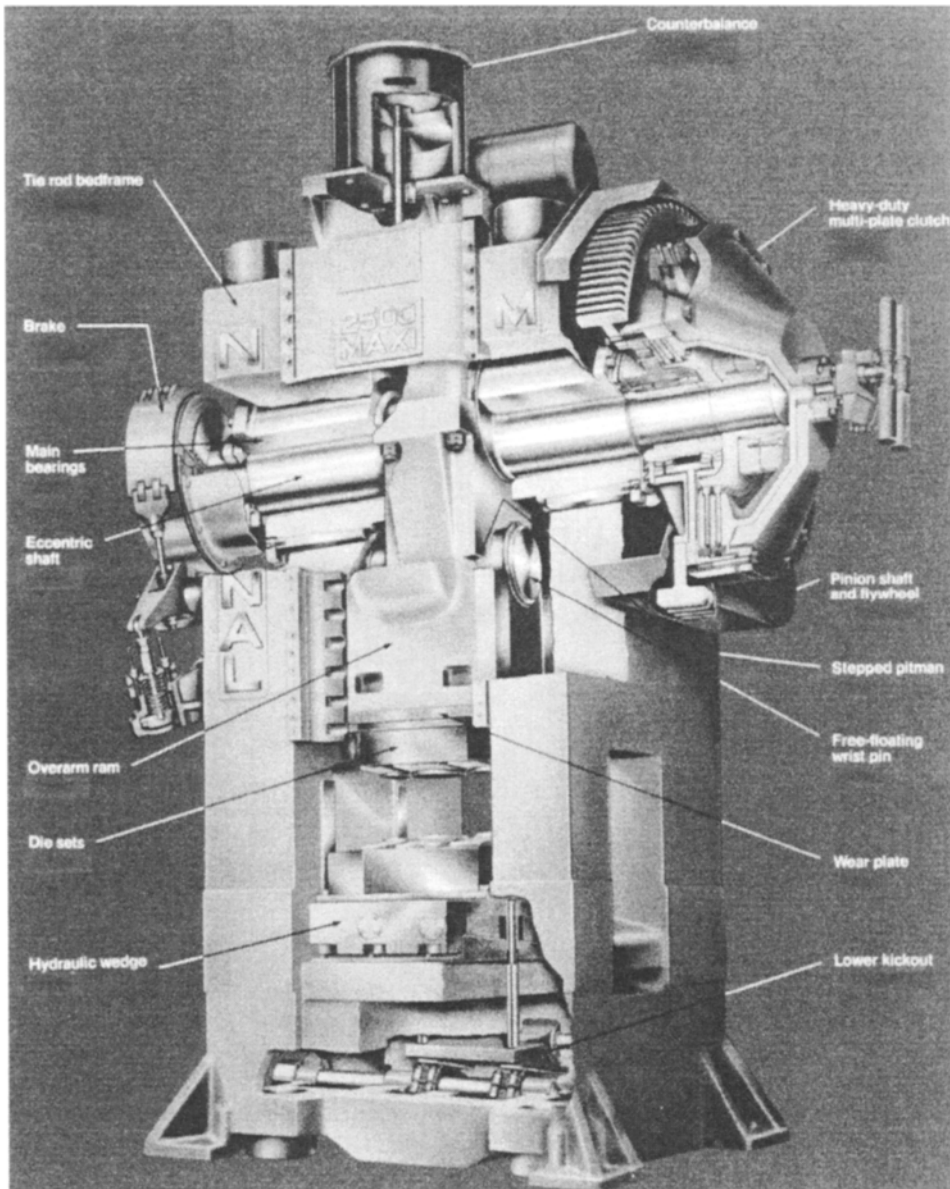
A mechanical forging press, capable of applying a force of 22 700 kN (2500 t) with major components identified, about 8 m total height. (Photograph courtesy of National Machinery Company.)
